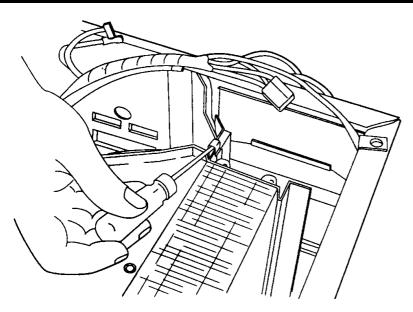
Clip Securing Cab Blend-Door Assembly to Evaporator
